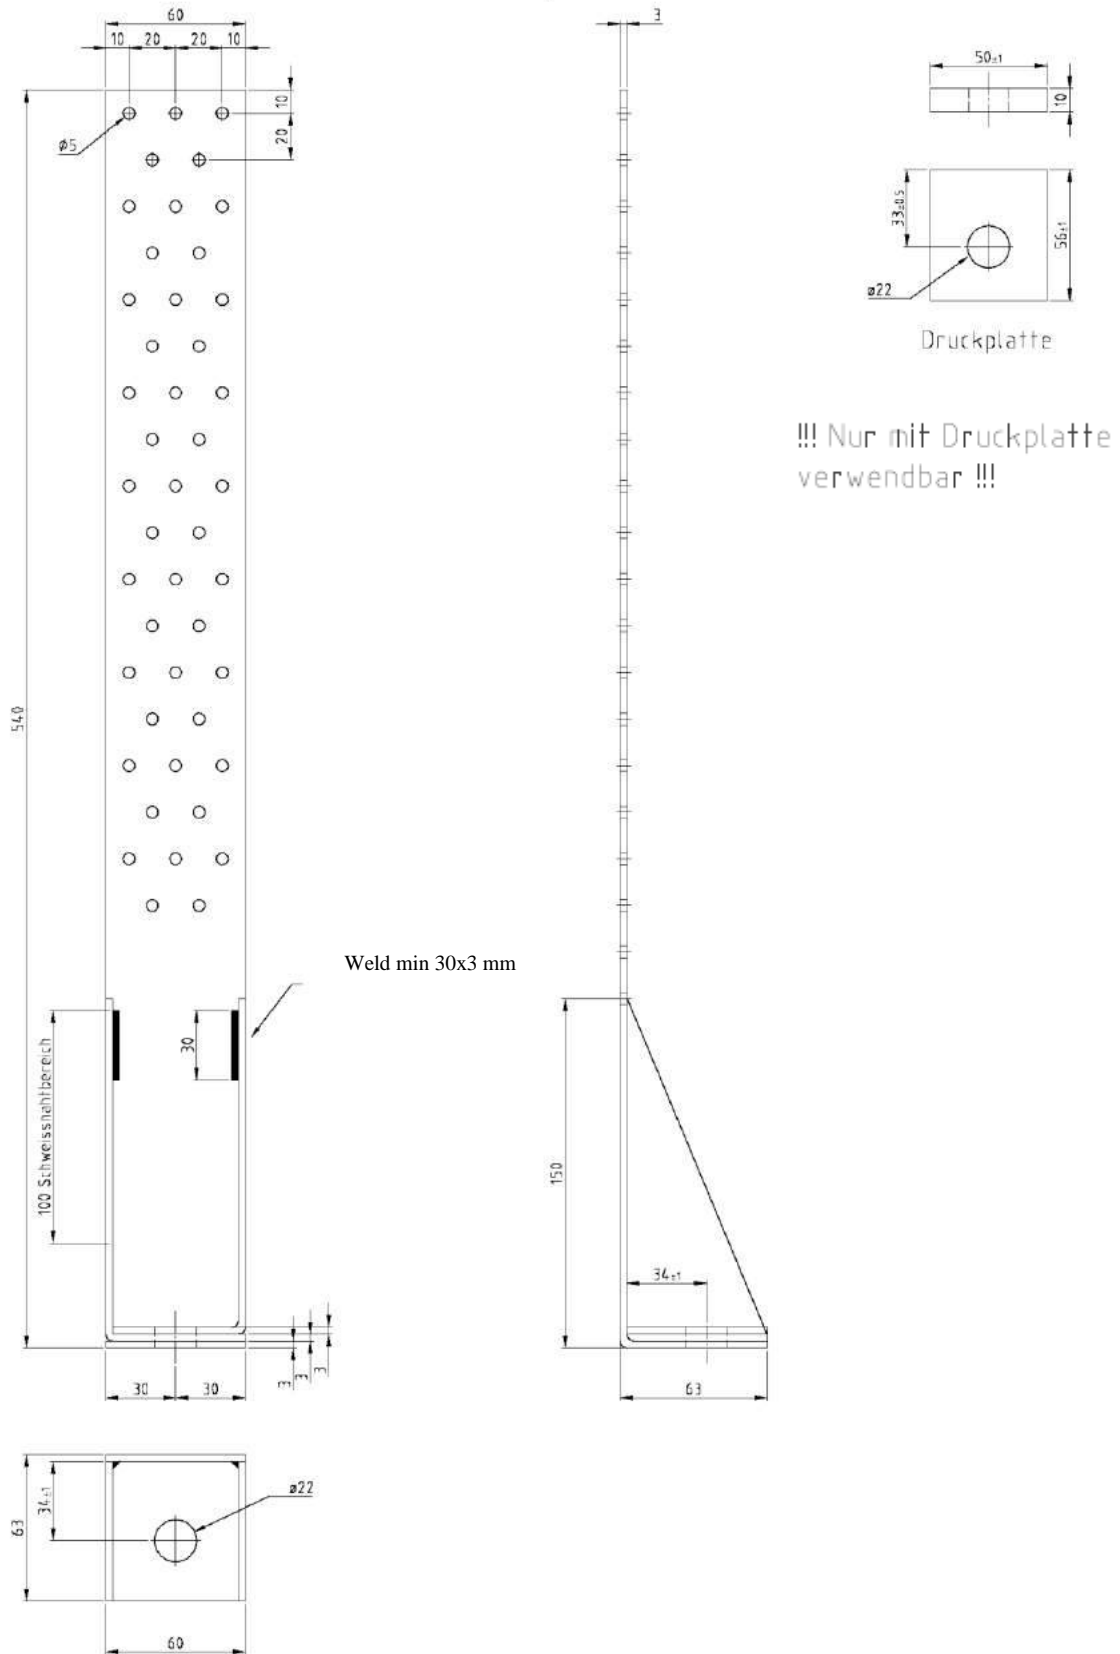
Dimensions of type WHT540 Big Hole (with washer 56x50x10)
